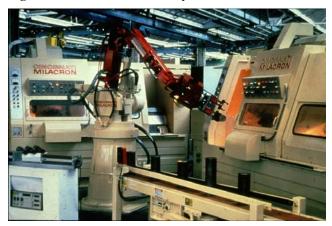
Robotic Part Loading in an Automated Machining Cell
